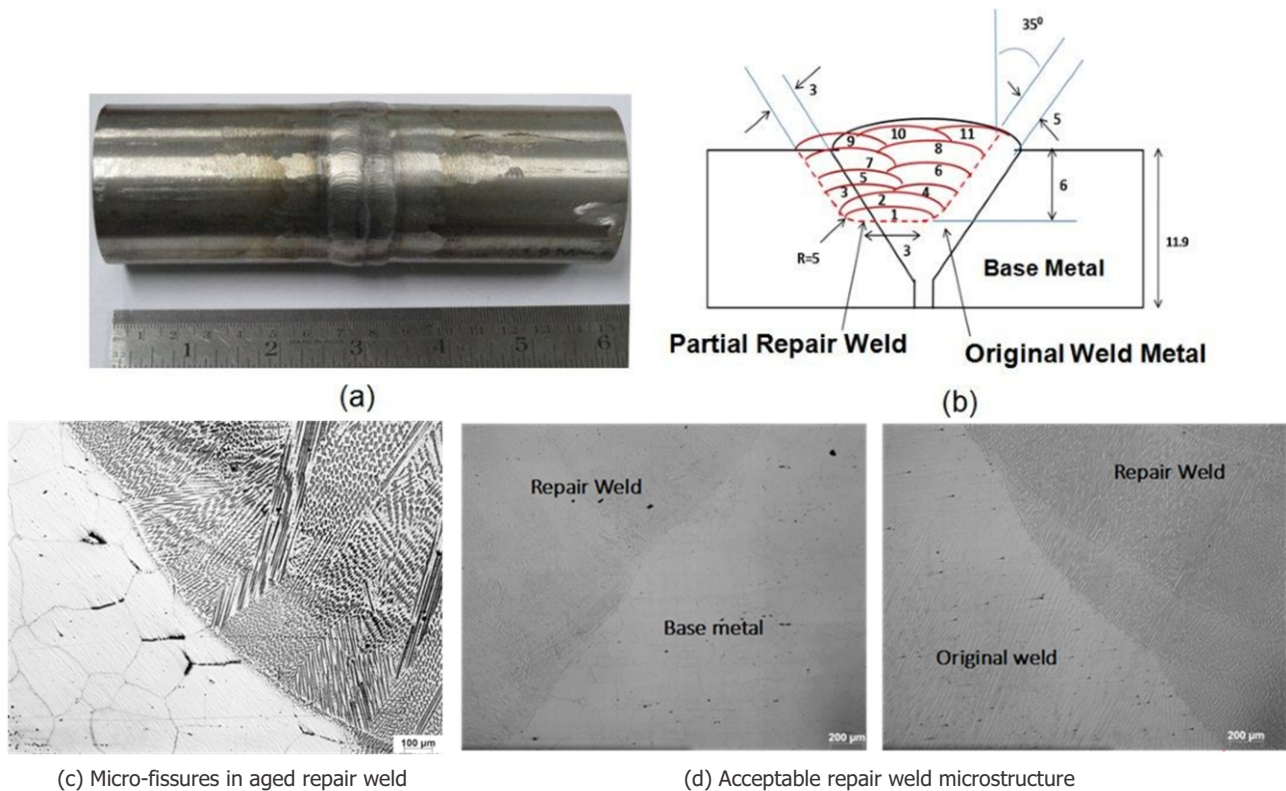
(a) photograph of manual multi-pass TIG Alloy 617M welded tube, (b) Schematic of partial repair weld groove design in overlap with original weld and base metal, (c) micro-fissures in the weld HAZ of repair weld carried out in aged condition, and (d) repair weld free from micro-fissures carried after the aged weld tube subjected to solution annealing heat treatment (1160°C/1h).
